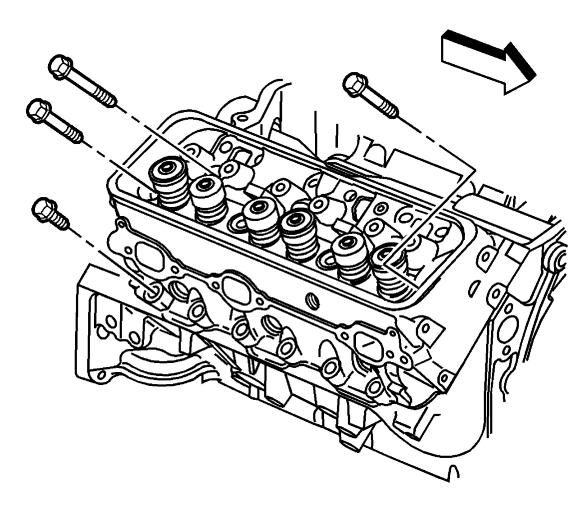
Locating Cylinder Head Bolts (Right) Courtesy of GENERAL MOTORS CORP.
